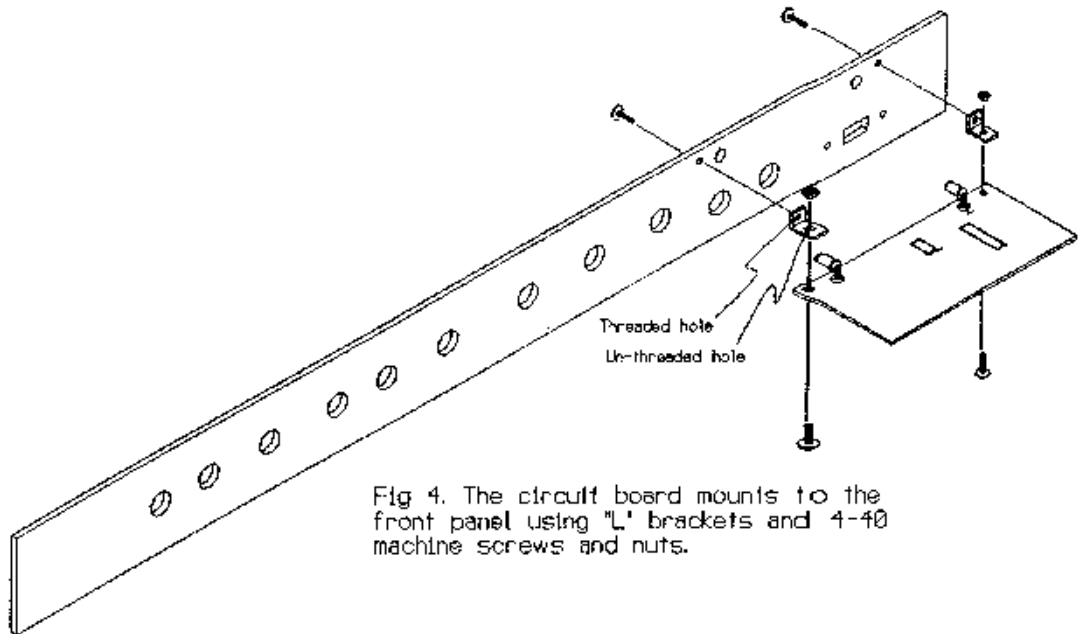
The circuit board mounts to the front panel using "L" brackets and 4-40 machine screws and nuts.
